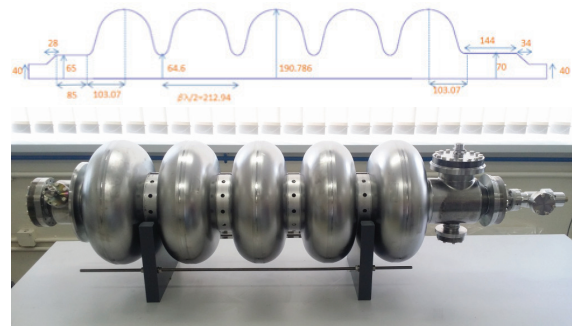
Mechanical dimensions of the $\beta = 1$ SPL cavity and a photo of the assembled cavity ready for testing.
